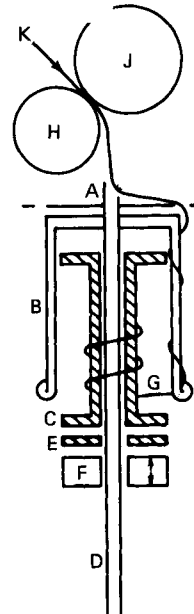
Flyer lead delivery side elevation. A, hollow spindle top (bearing not shown); B, flyer leg; C, bobbin; D, spindle (driven from bottom); E, felt drag washer; F, lifter rail (vertical traverse); G, slubbing (pulling bobbin round); H, drafting zone bottom front roller; J, drafting zone top front roller; K, drafted fibres
